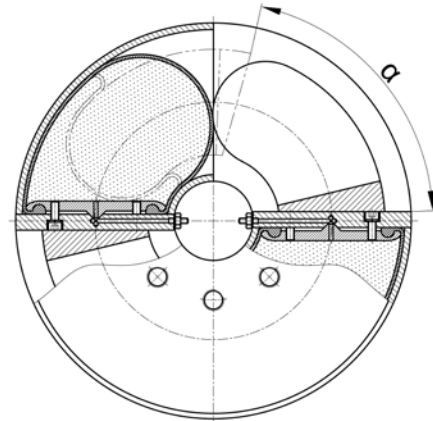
The maximum twist angle of the piston pneumatic flexible shaft coupling type 2-1/110-P-C
